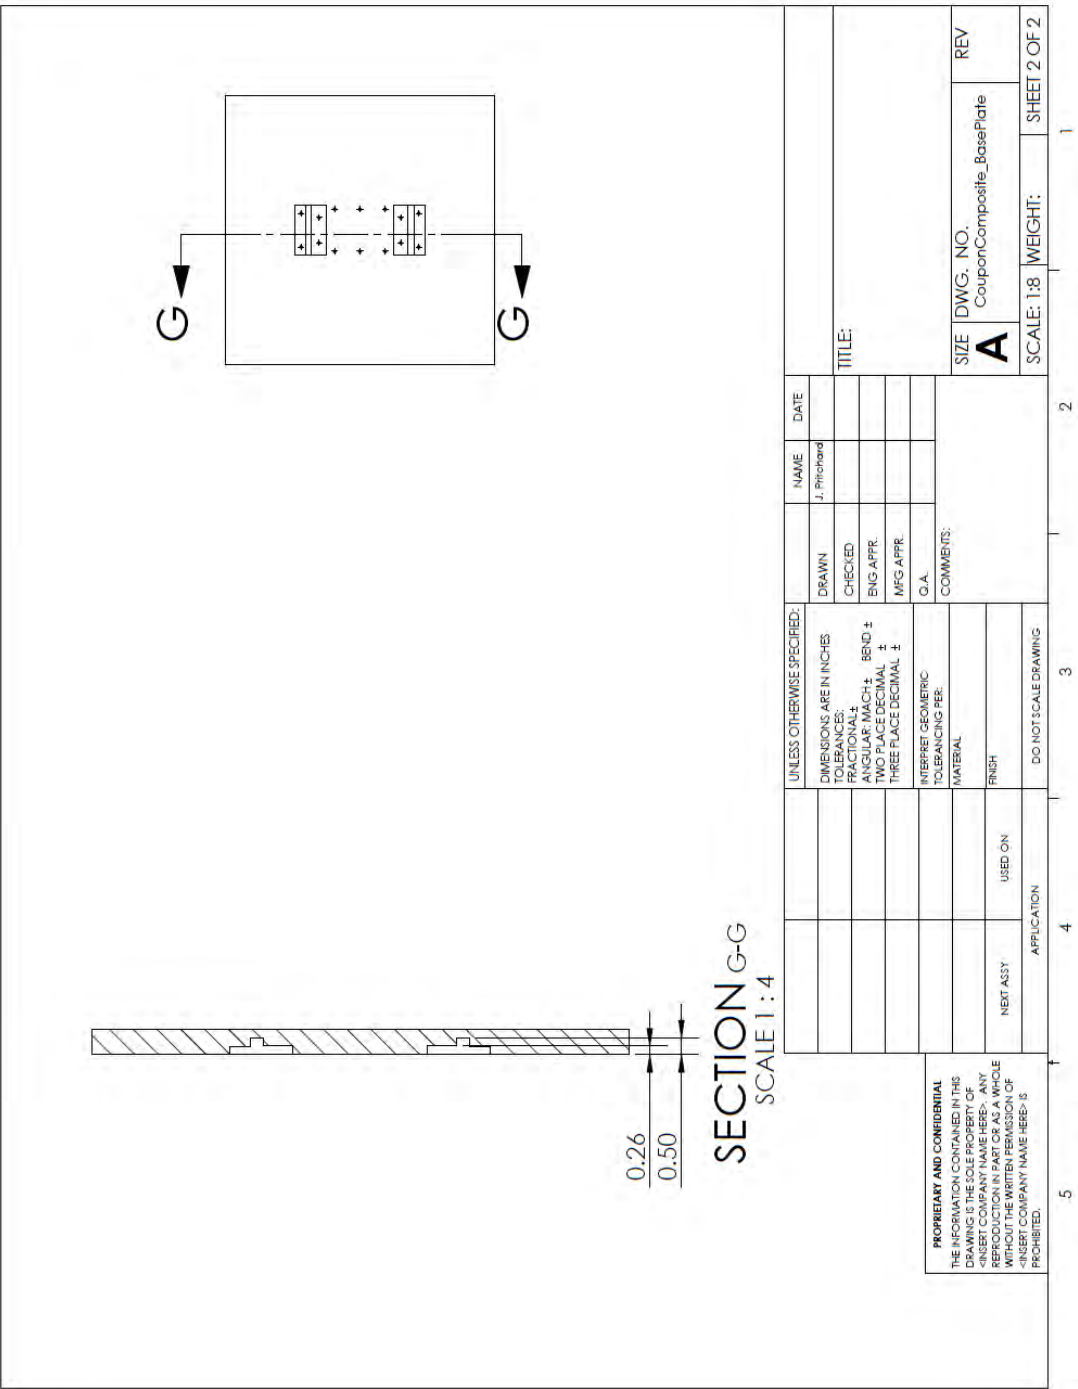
Dimensional drawing of base plate for producing coupon samples. Sheet 2 of 2.
